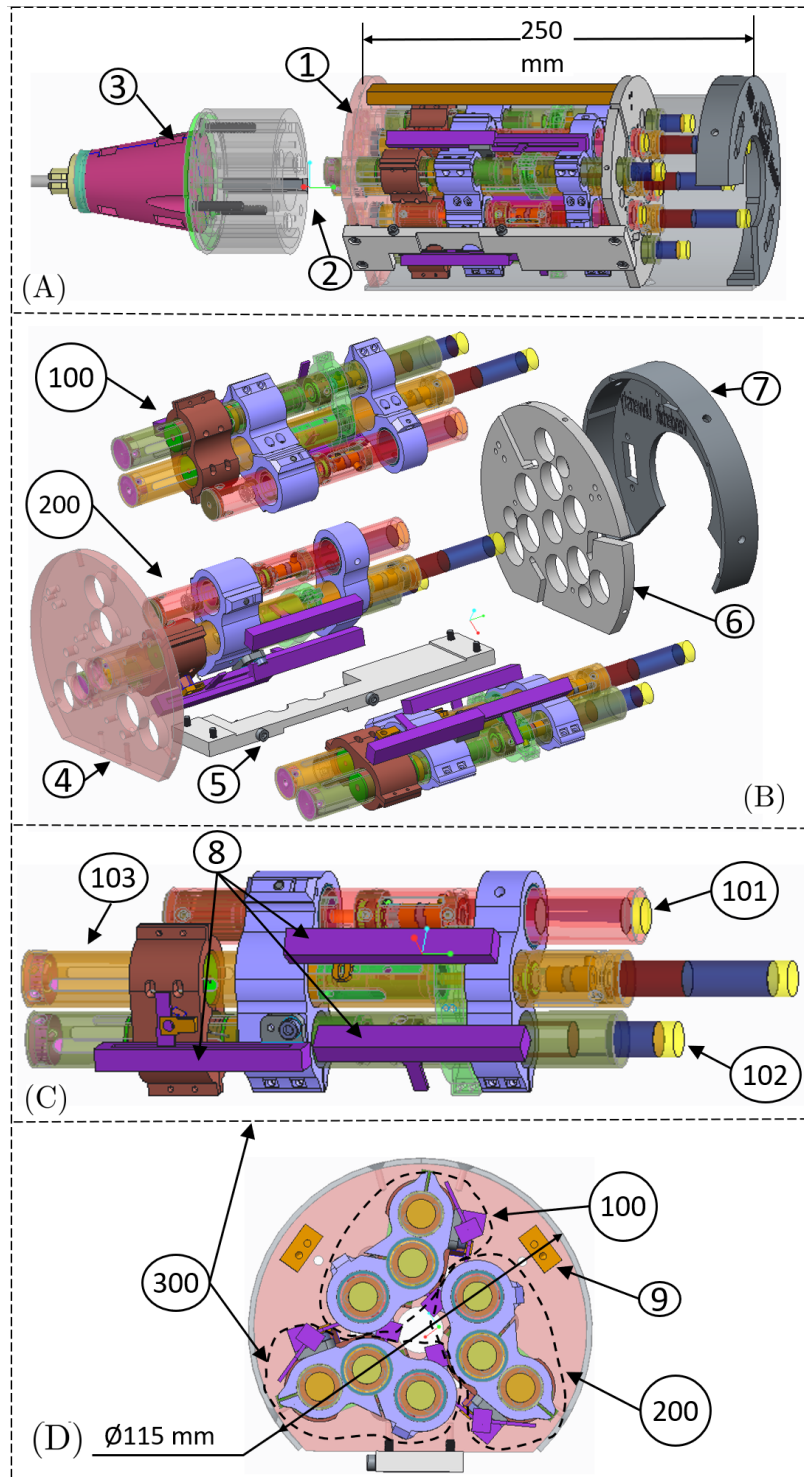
Actuation Unit Exploded view: (A) Assembly showing the actuation unit ①, the detachable actuation interface ②, and the actuation cone ③; (B) Exploded view showing the three backbone actuation modules ⑩①②, (C) bottom view showing axial symmetry, (D) backbone actuation module assembly
